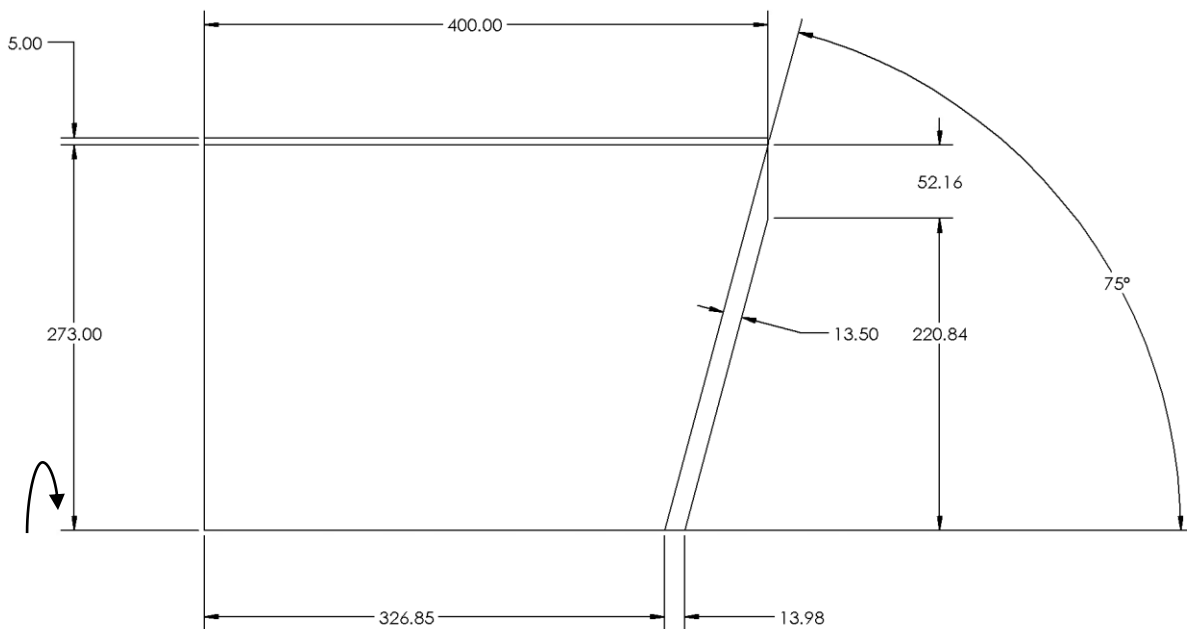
2D Drawing of 143.35 kg TNT Shaped Charge with 13.5 mm Liner Thickness (Dimensions are in mm).
